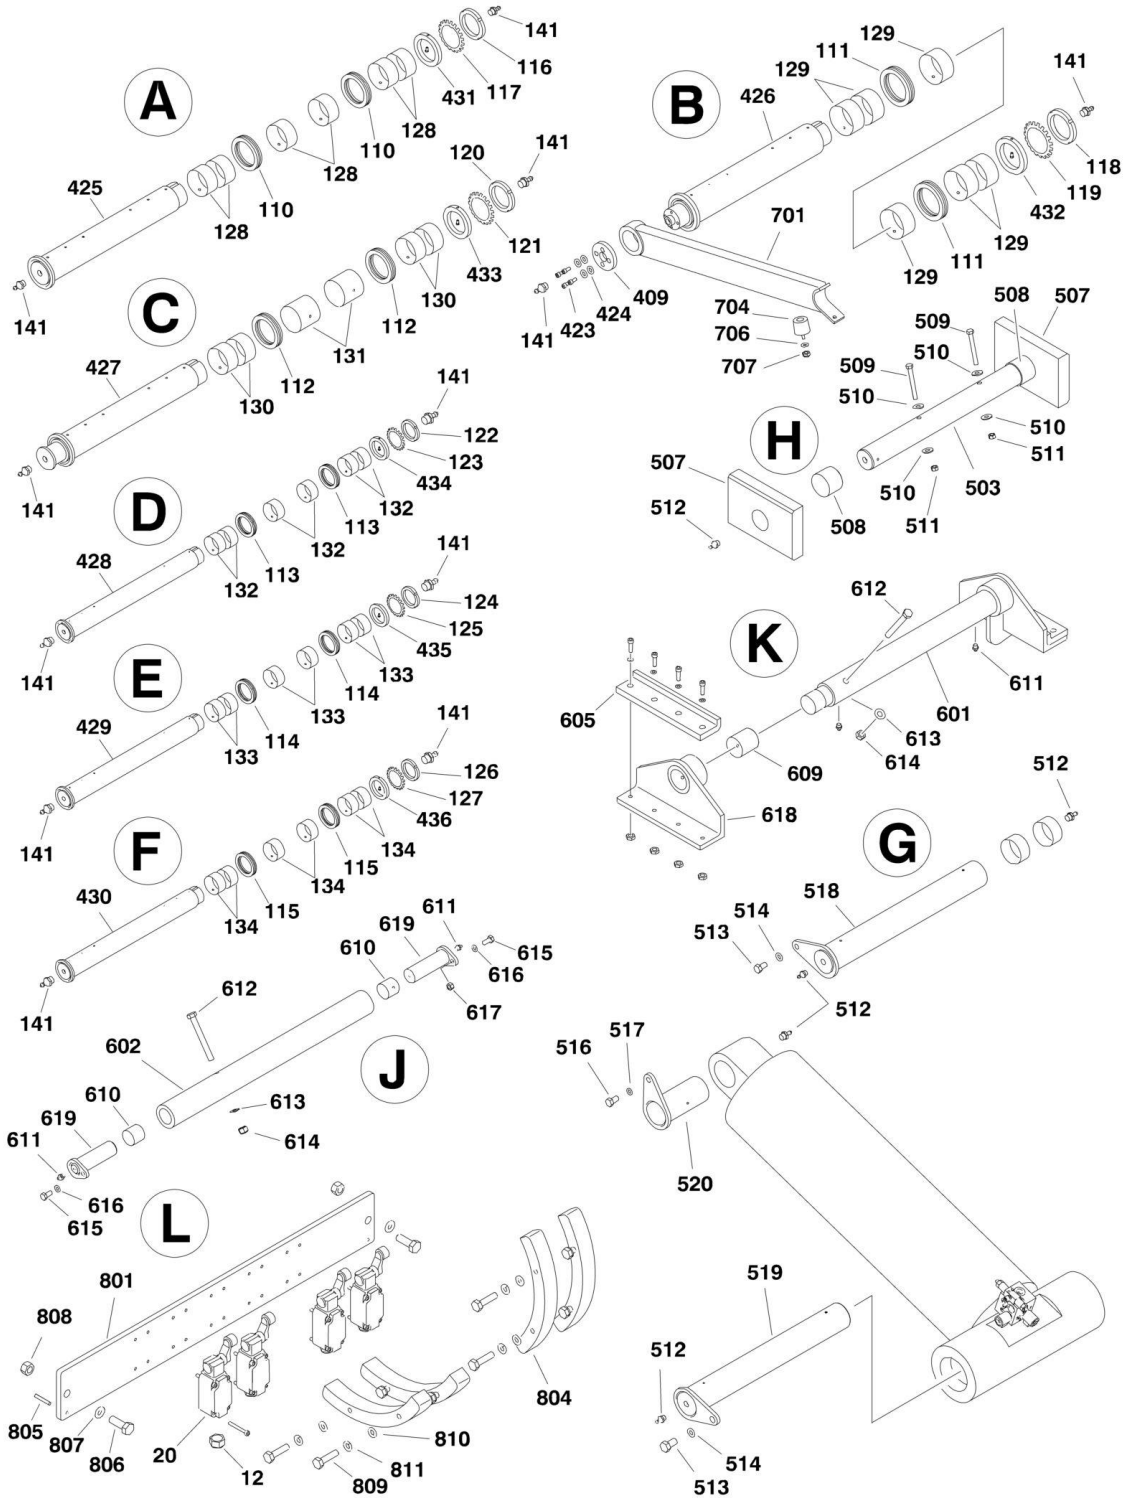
SCISSORS ARMS INSTALLATION
